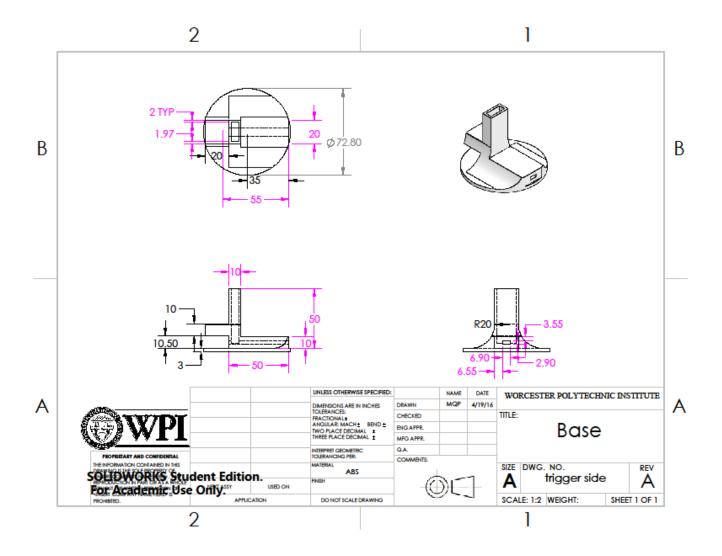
Solidworks Drawing for Trigger Side Base of Final Design
